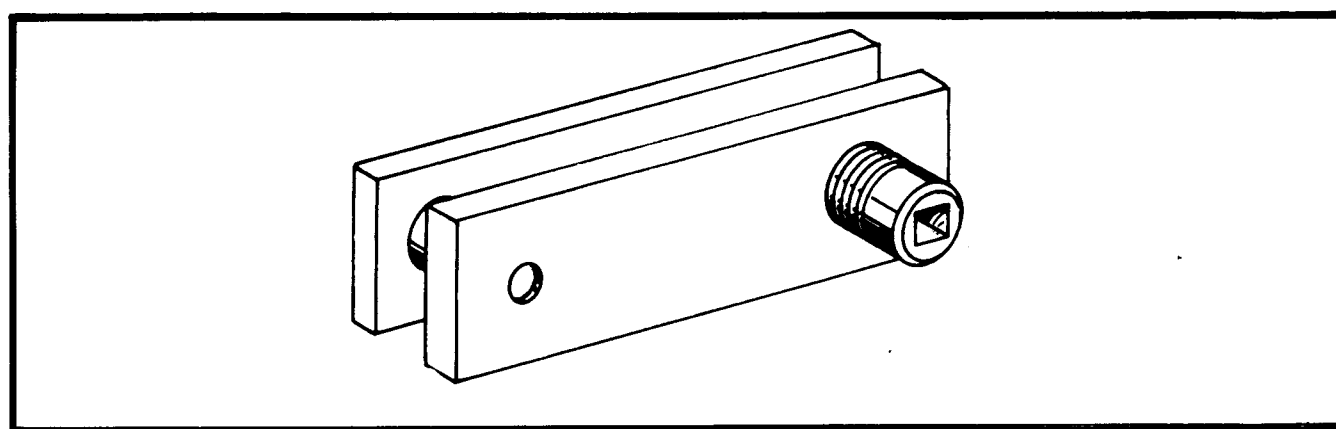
Crankshaft Blade and Dampener Bushing Remover and Replacer.
